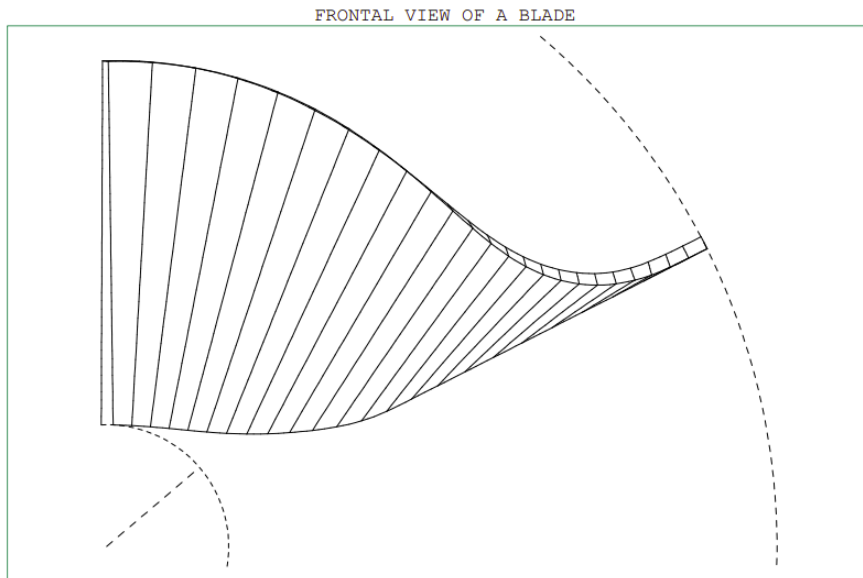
Frontal view of the impeller blades from GASPETH.
